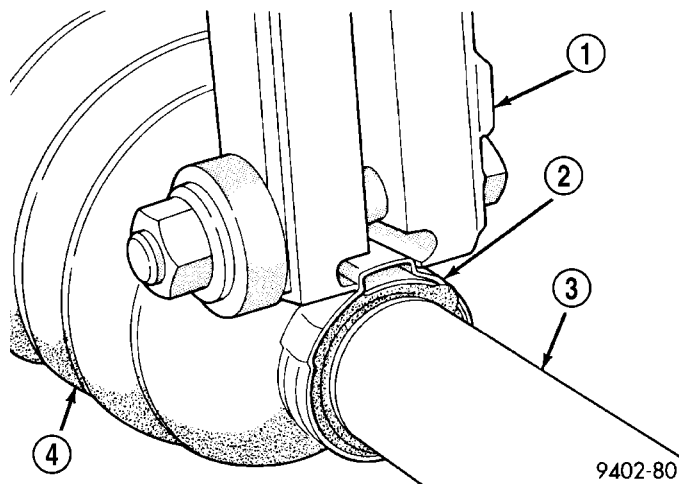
Crimping Tool Installed On Sealing Boot Clamp
